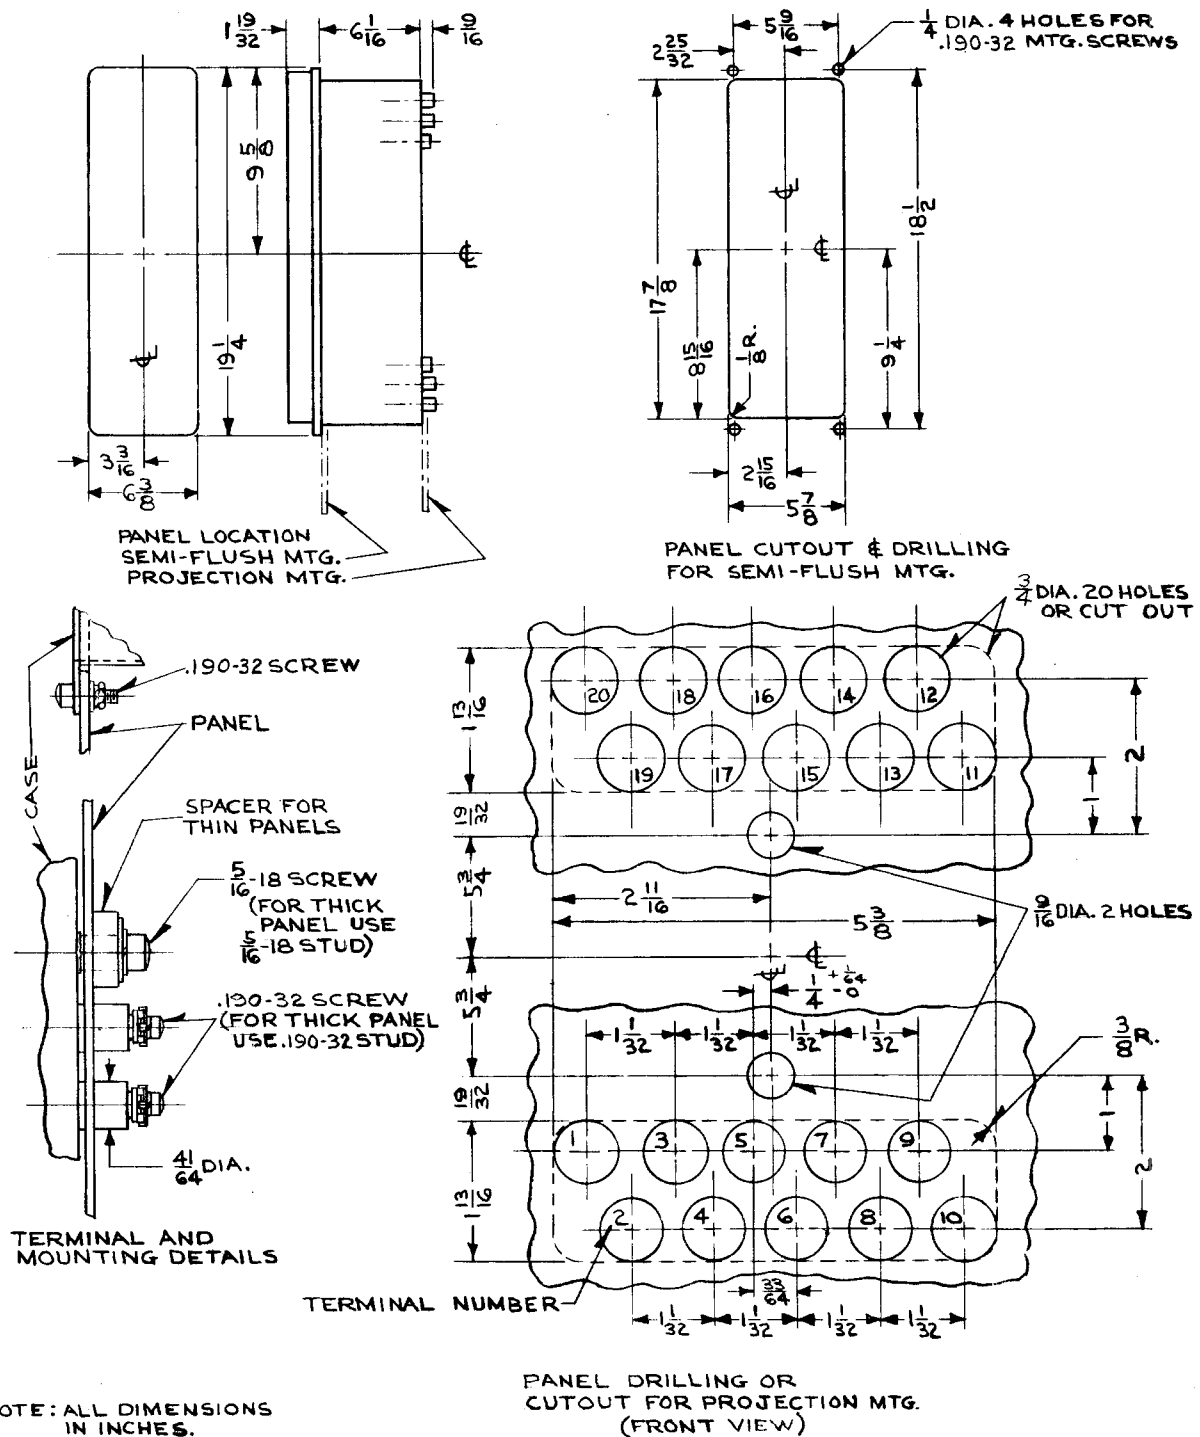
Outline and Drilling Plan for the Type FT41 Case
